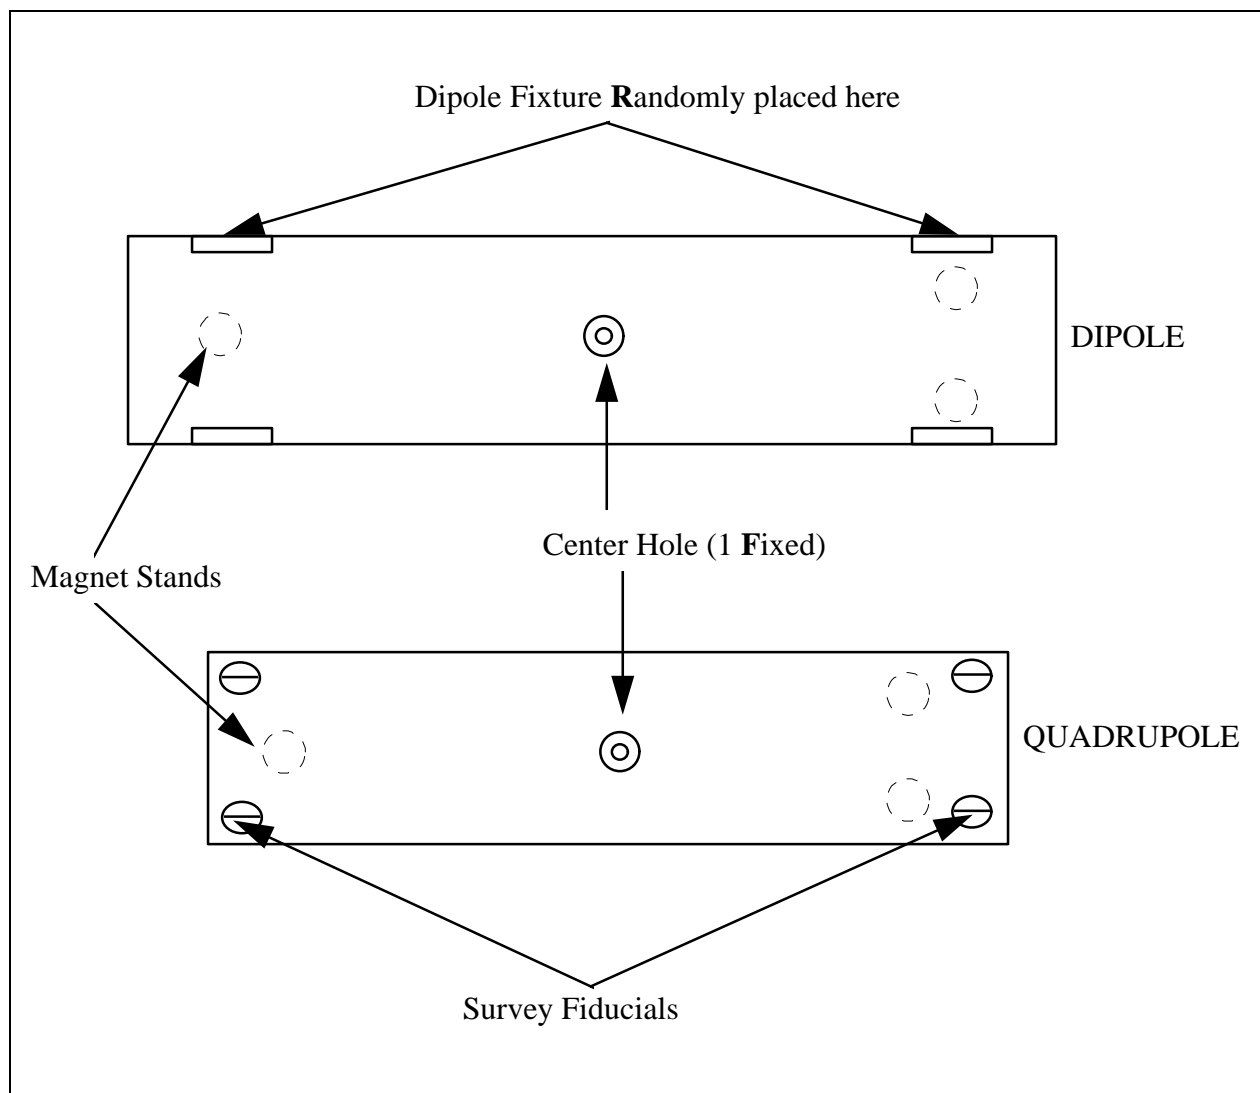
Dipole and Quadrupole Magnets showing Fixture locations.
